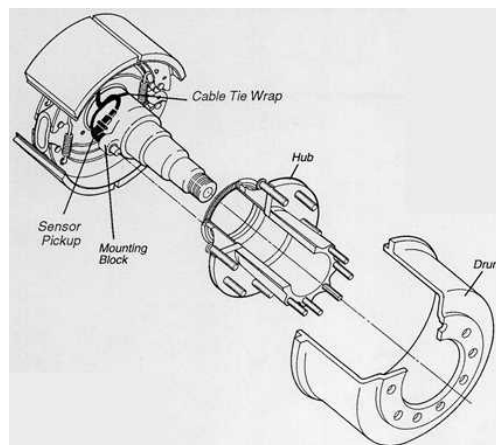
Exploded view for wheel speed sensor install location [2]
